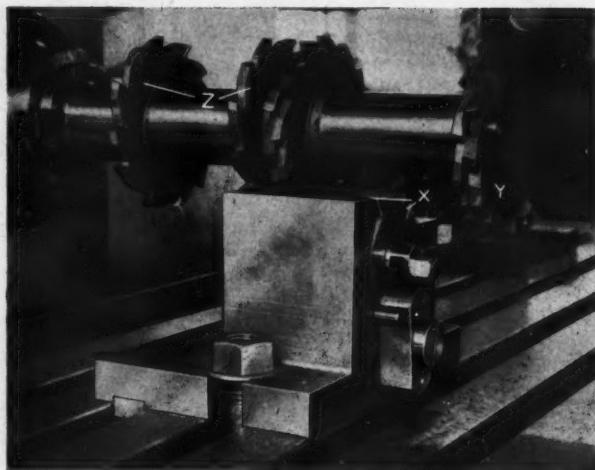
The fixture for milling the outer pair of knife edges and associated shoulders. A blank in its holder is located successively in two positions at 110 deg. After this stage, the holder and blank are transferred to a similar fixture at the other end of the table, and the inner knife edges are milled
